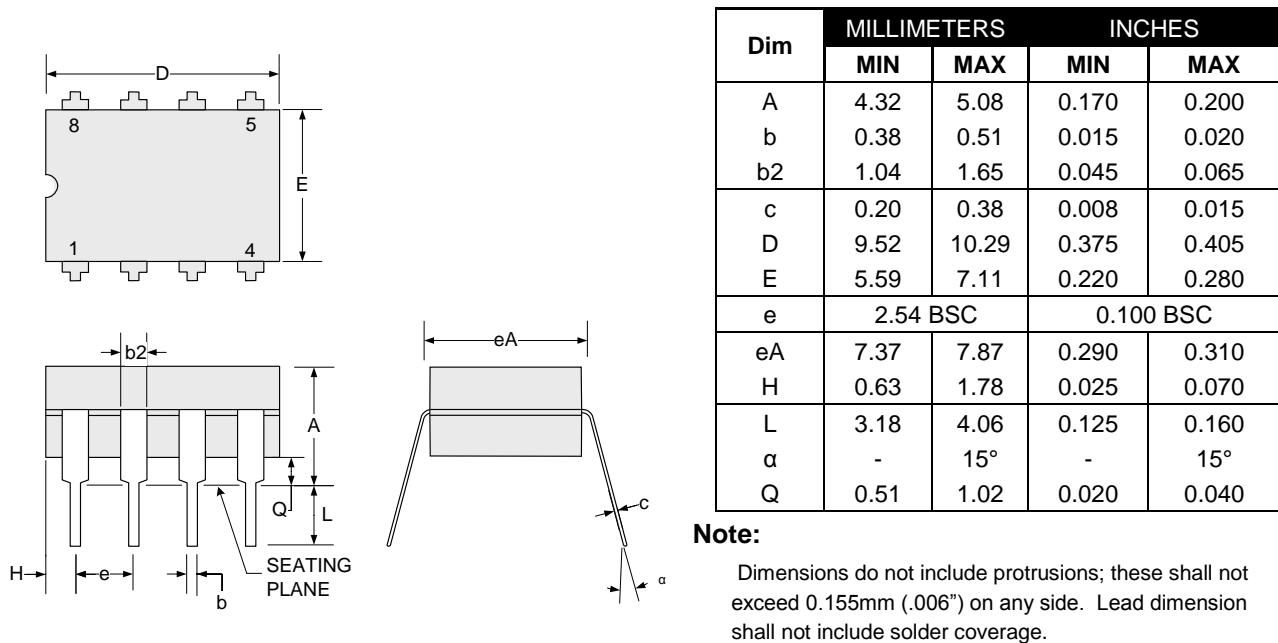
Y 8-Pin CERDIP Package Dimensions
